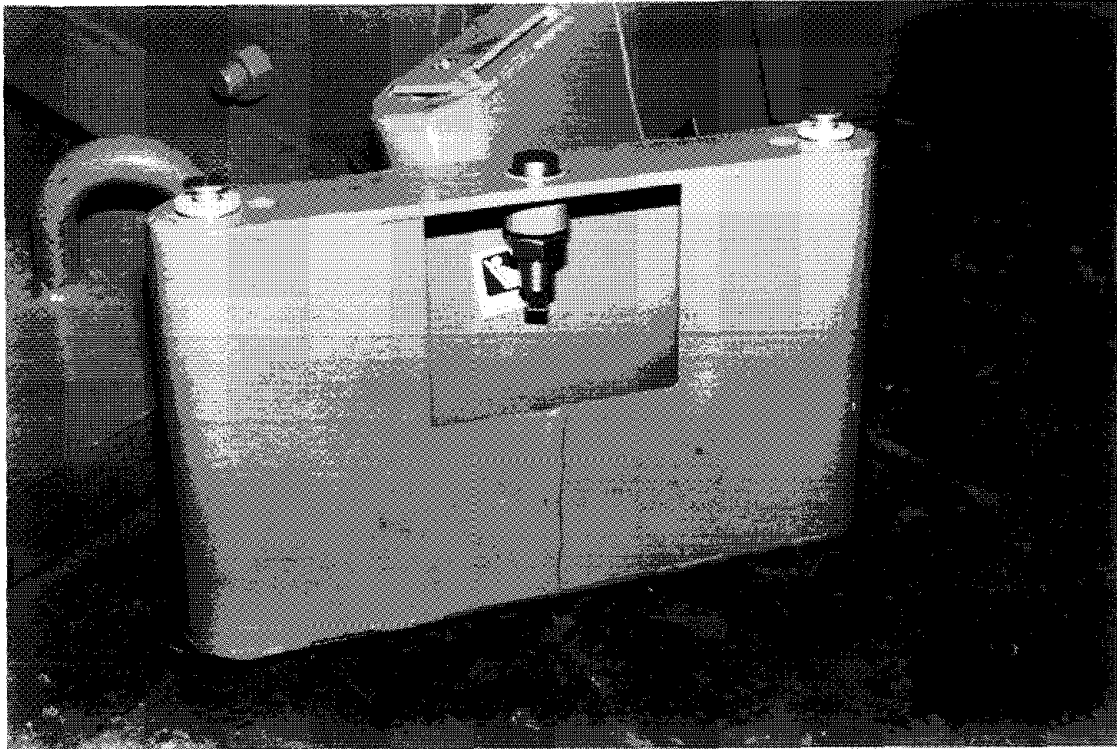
Floor Pedestal Photograph Showing Access Cutout for Locating/Locking Pin and Bottom Plate
